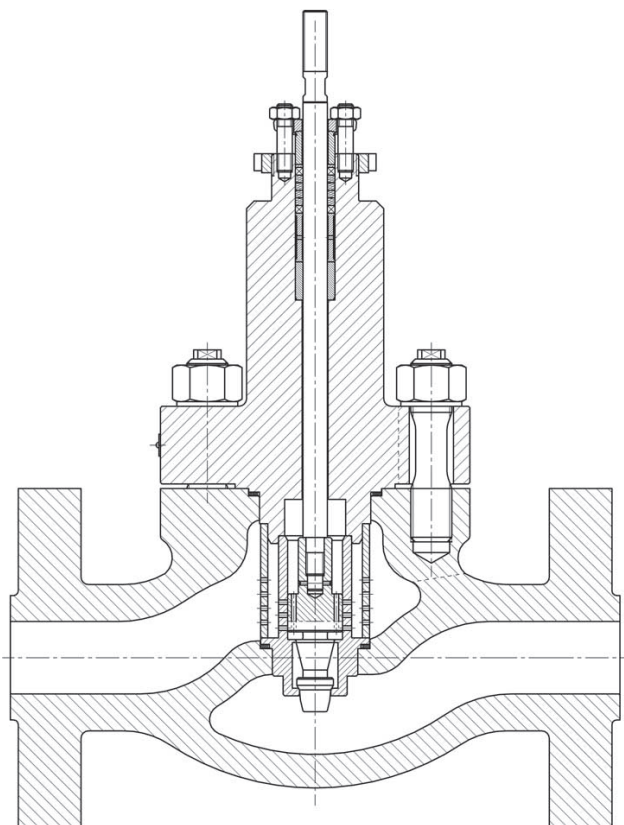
Valve of the Z1A type, with a multi-stage valve head and a choking cage.
